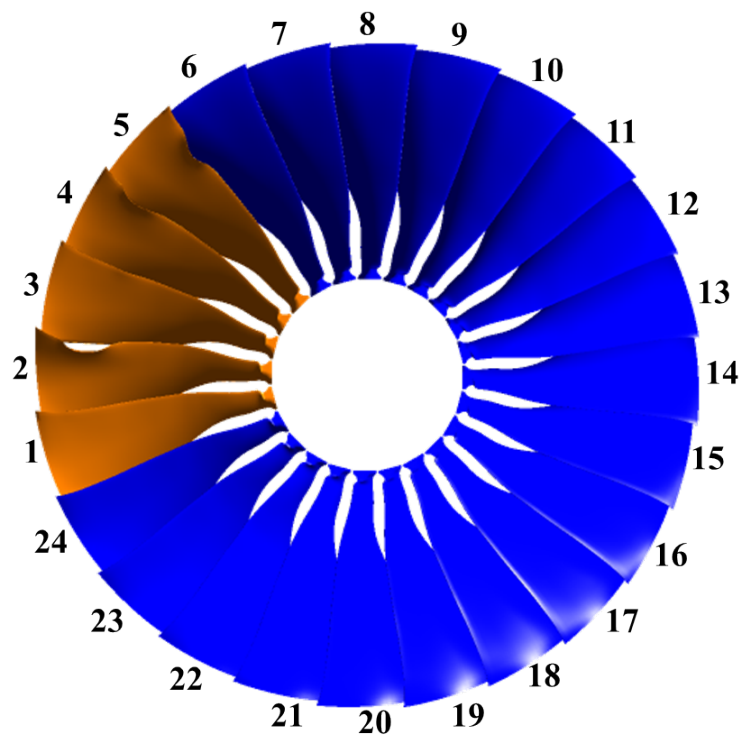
Bird-damaged fan with damaged blades highlighted in orange.
